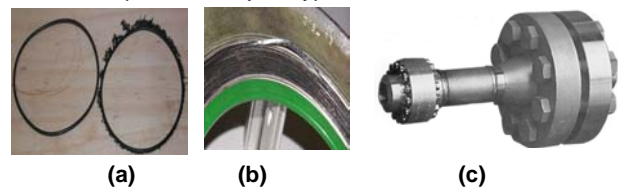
(a) New and used O-ring for NG Joint, (b) Damaged Gasket during Bolt Up, (c) Visual comparison
